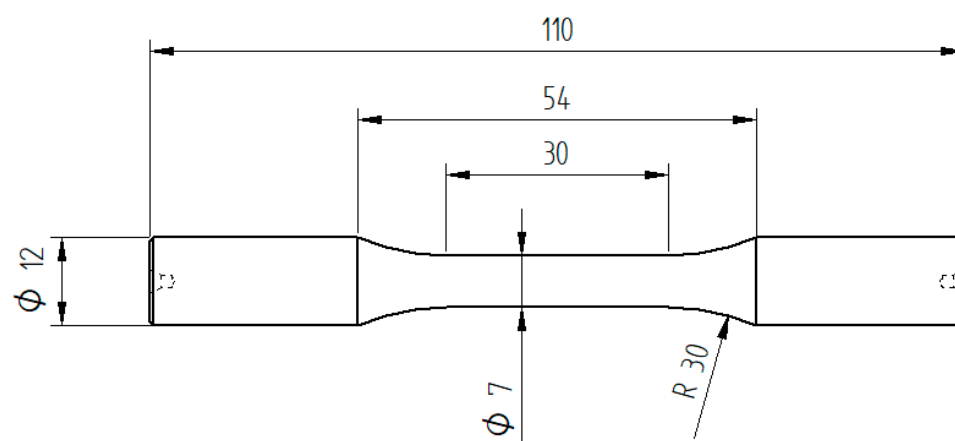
Specimen geometry used for rotating bending fatigue experiments. The dimensions are given in mm.
